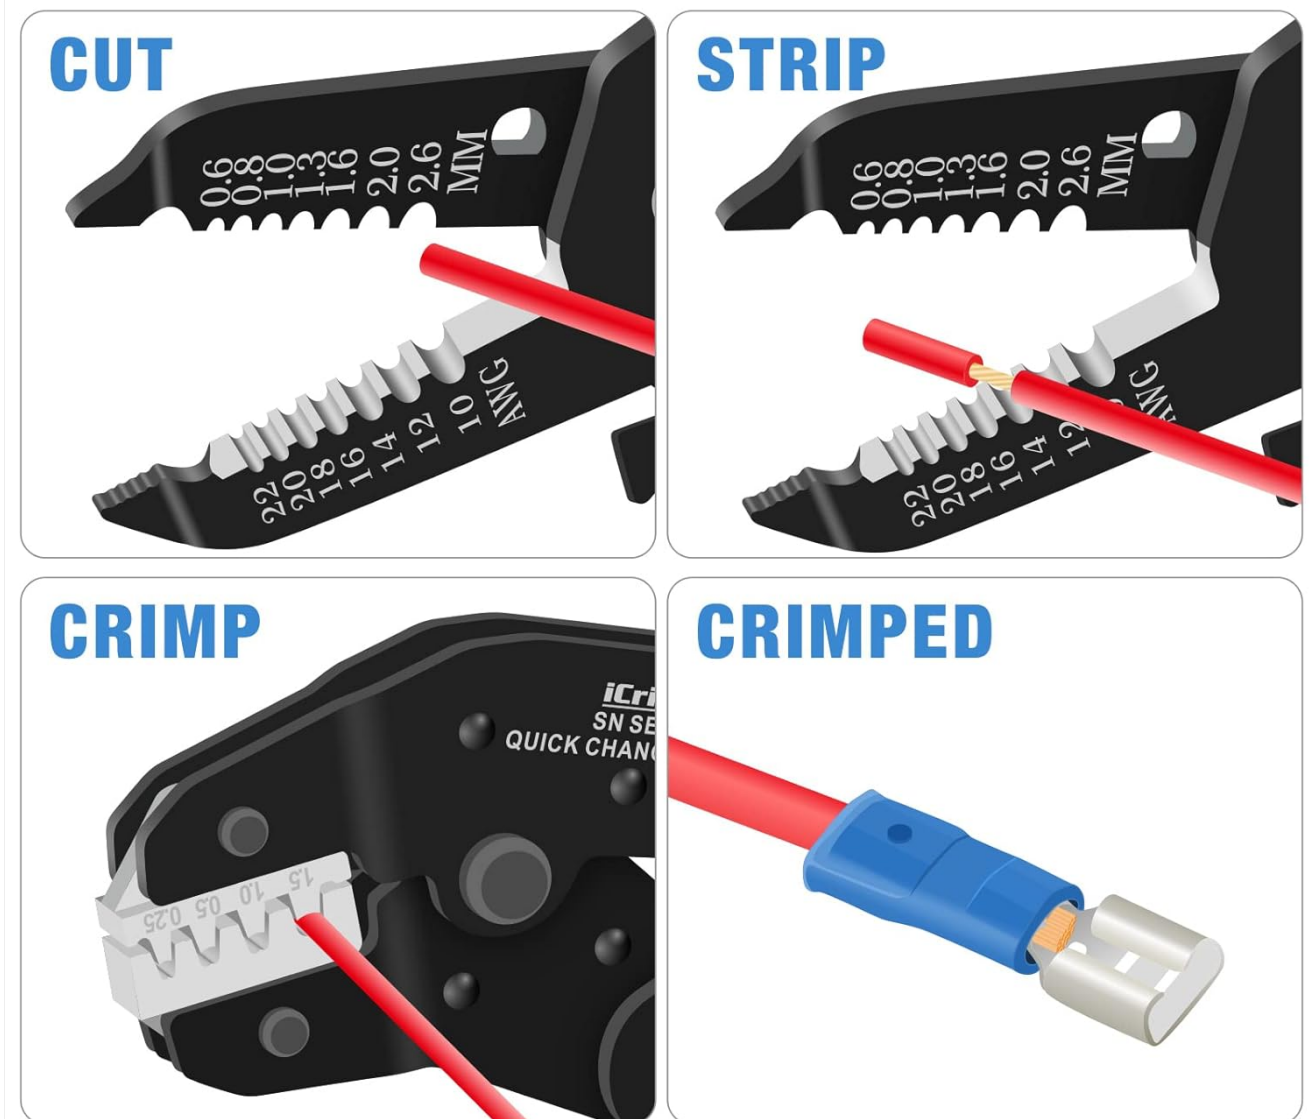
Visual guide demonstrating the process of cutting, stripping, and crimping a wire with the tool kit.
